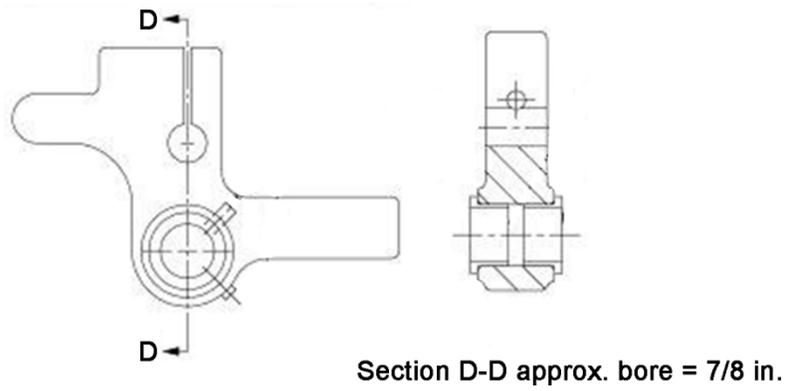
Example of 10 in. (6261T or AM) Roller Guide Lever Arm Dual Bushing Arrangement
